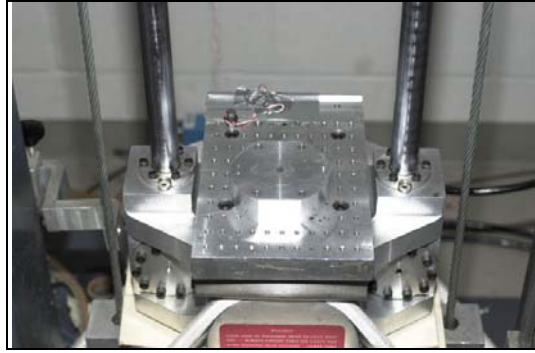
Horizontal shock fixture mounted to ARL impact test machine.
